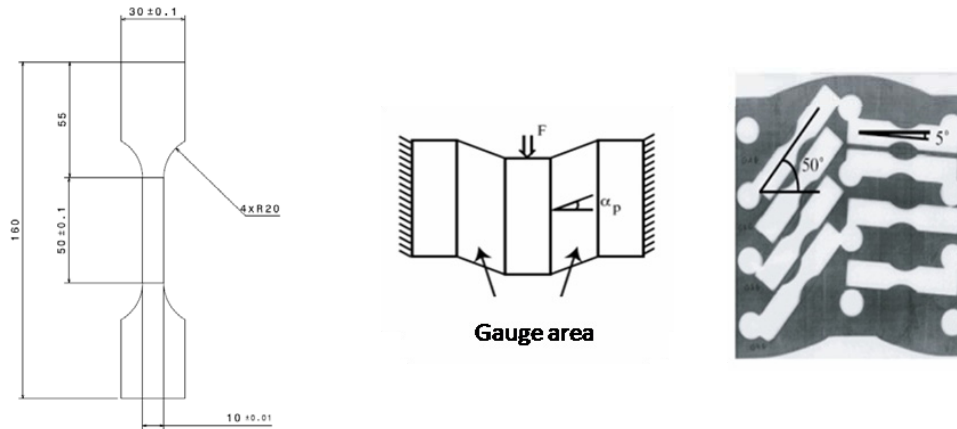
(a) Dimensions of the specimen used for tension pre-strain; (b) Principle for pre-strain in shearing mode and removing of the specimens for self-heating measurements.
